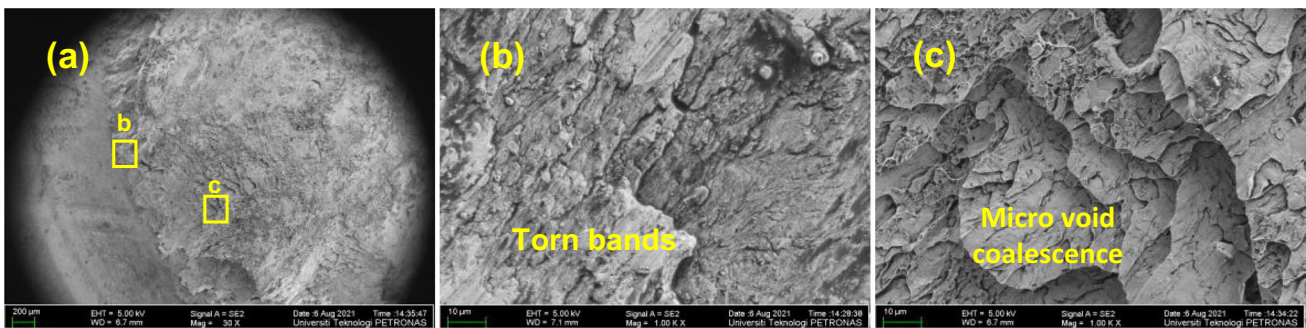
Fracture surface morphology of the weld failed via Type-1 mode a overall view, b at outer ring of nugget, and c at the centre of nugget
